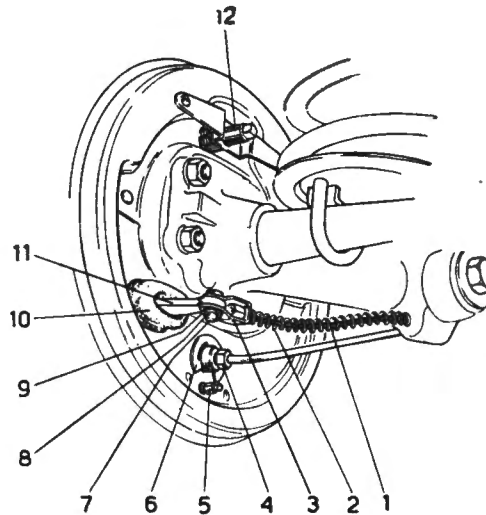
Rear brake back plate. (Left-hand side shown).
